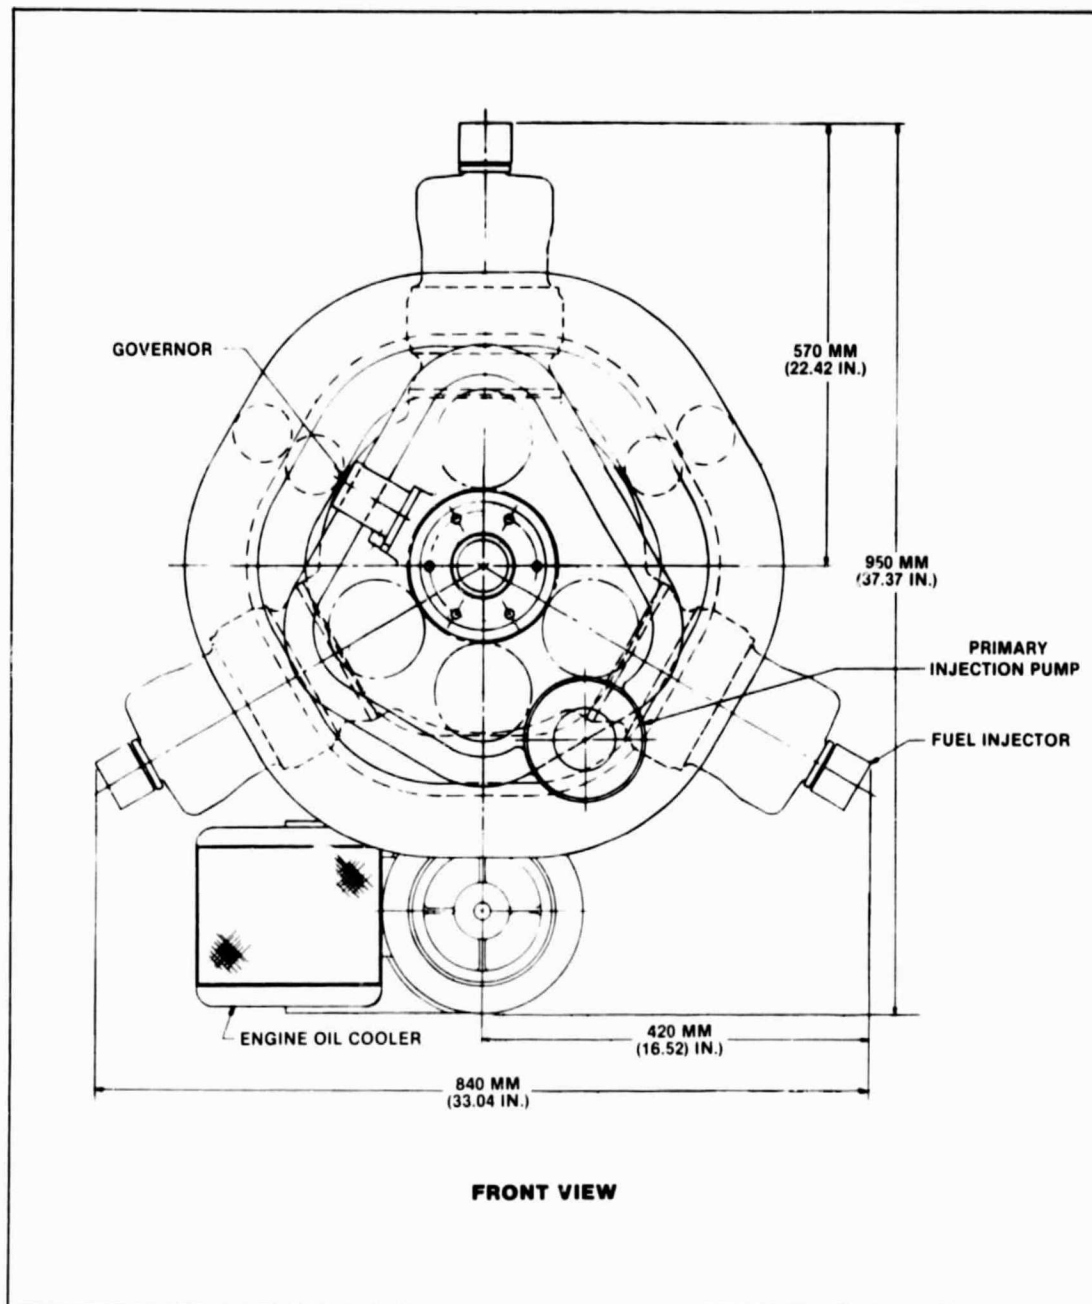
895 kW COMMUTER AIRCRAFT DIESEL - FRONT VIEW
